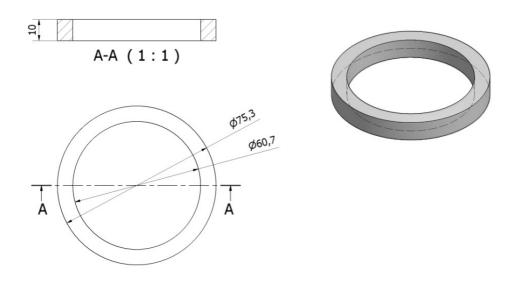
Aluminium Ring Insert for PCCC Mould
